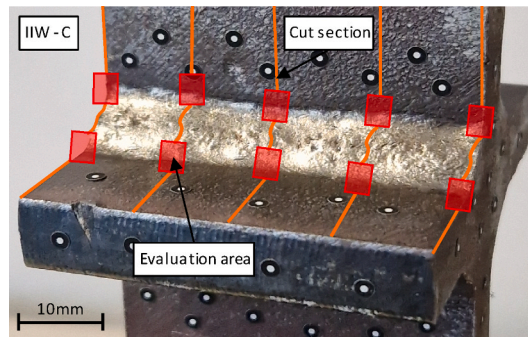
Cut sections and evaluation areas for one exemplary weld seam – IIW weld specimen C.
